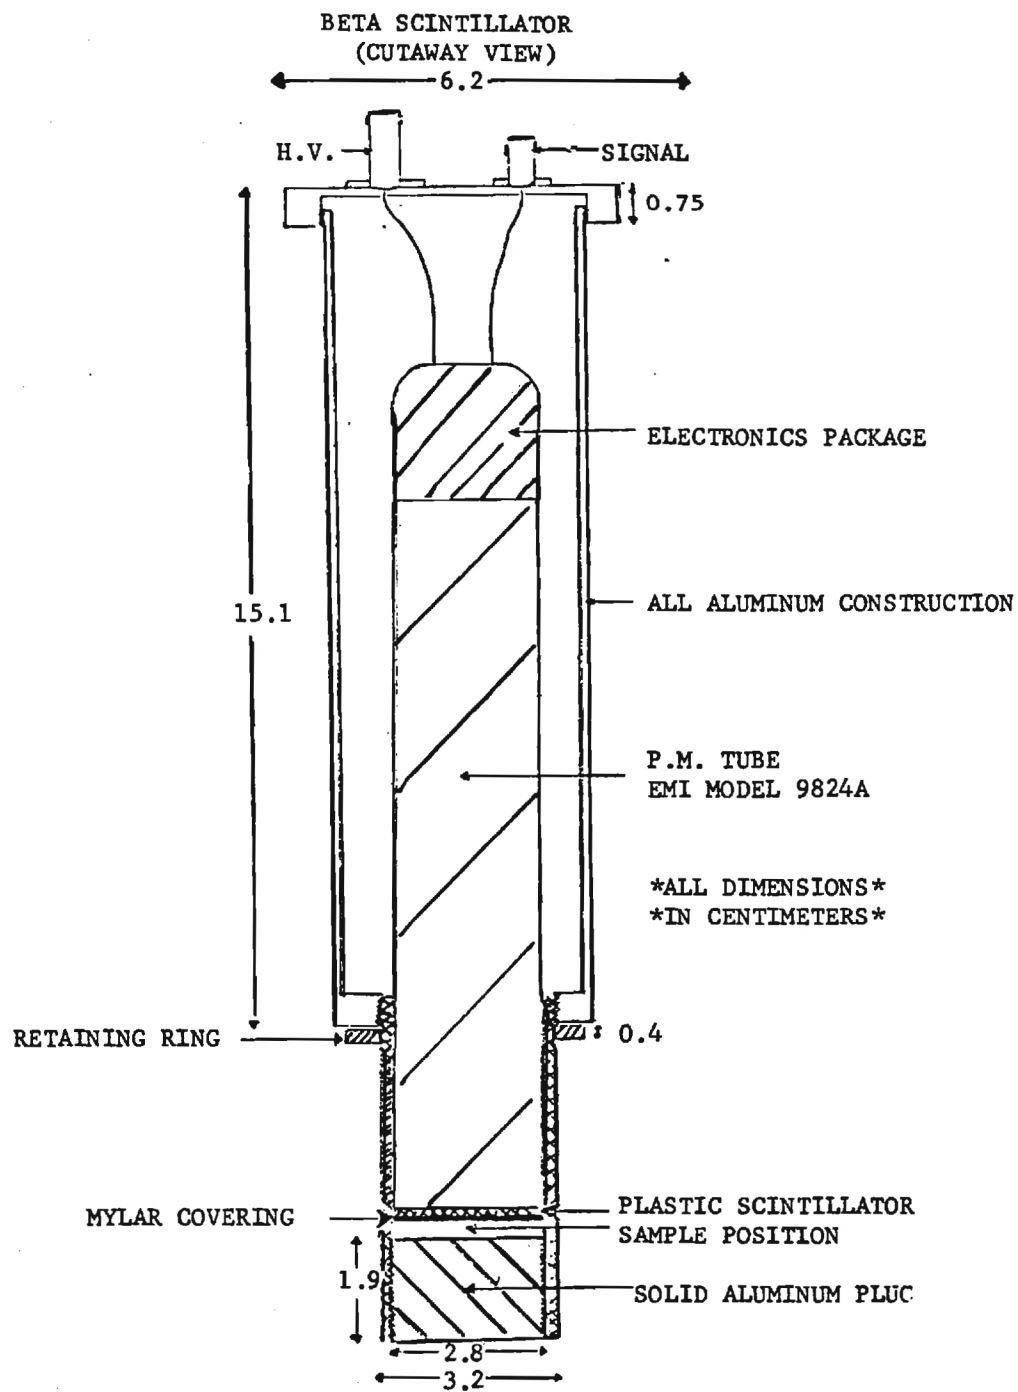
Improved Sample Holder of Beta-gamma Coincidence Measurement
